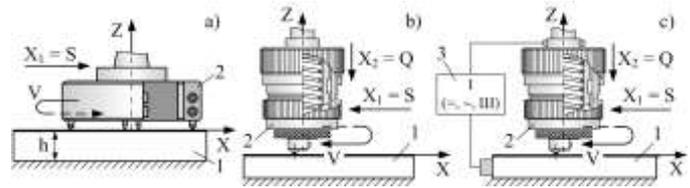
Examples of machining flat surfaces in systems with technological flexibility of the 2nd type: a is face milling by composite 10; b is diamond burnishing or rolling by springing tool; c is electromechanical processing by springing tool; 1 is a workpiece; 2 is a tool; 3 is a programmable source of constant, alternating or impulse voltage
